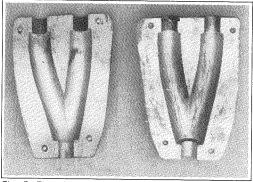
The GRP core mould split in half. then be used to make sand cores. With the wooden manifold pattern and GRP core pattern, sand moulds could be made and I was able to finally get the manifolds cast. Fig. 6.
